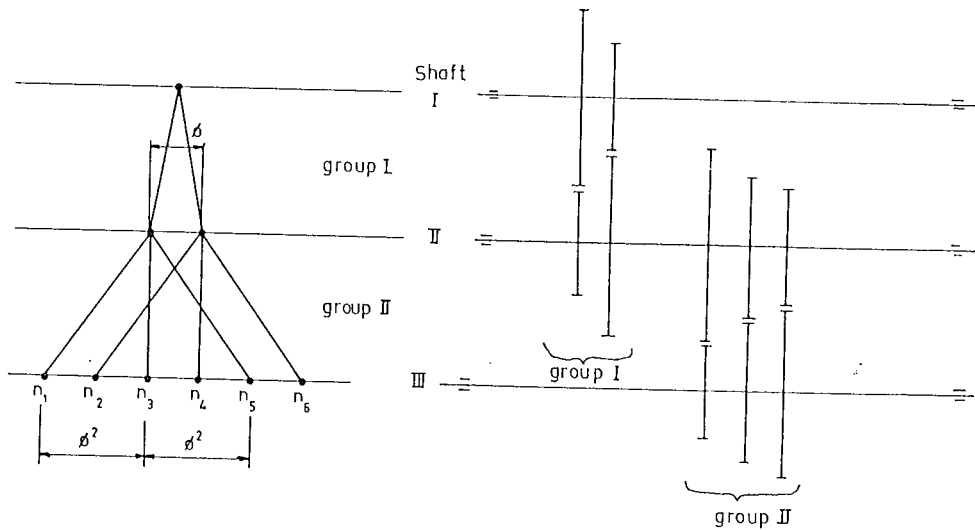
a Kinematic Arrangement Diagram of 6 Speed 3 Shafts Gearbox
